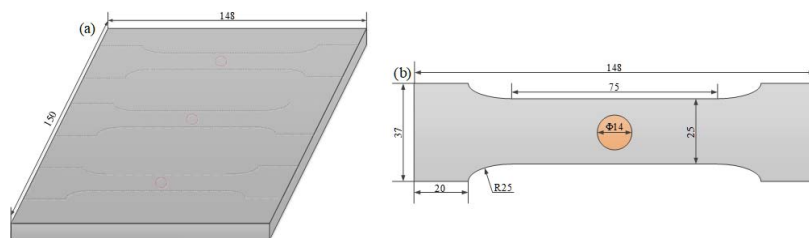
Schematics: (a) test plate and (b) dimensions of tensile sample (unit: mm)
